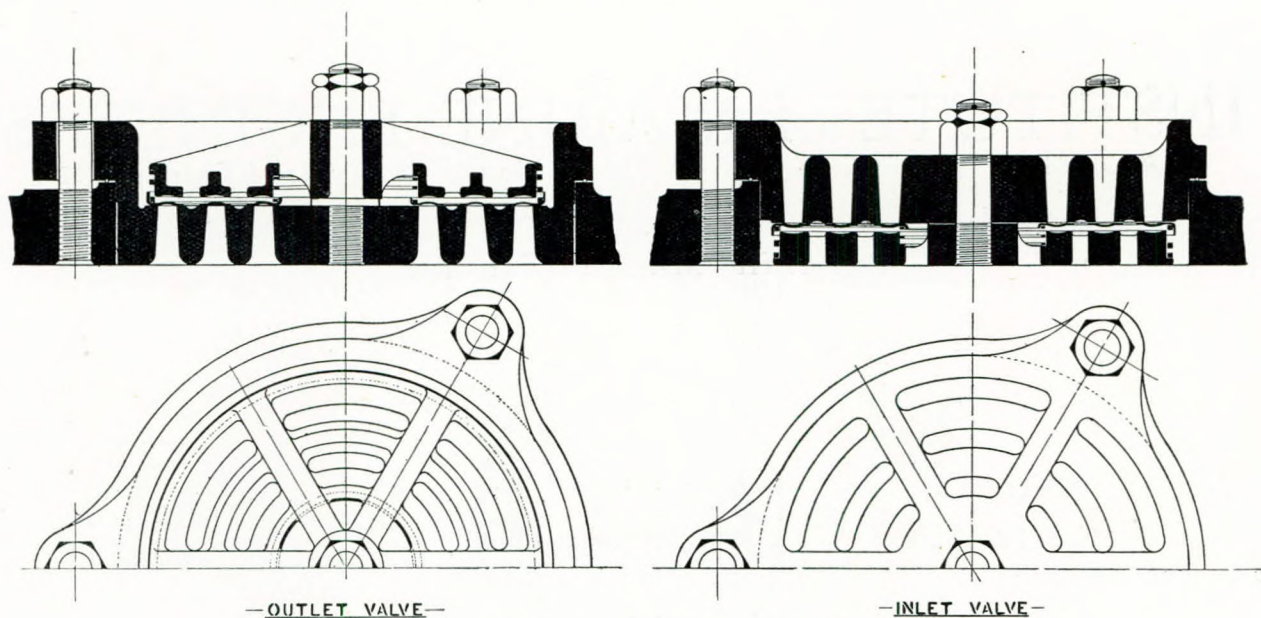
Sectional views and half plans of inlet and outlet valves.
